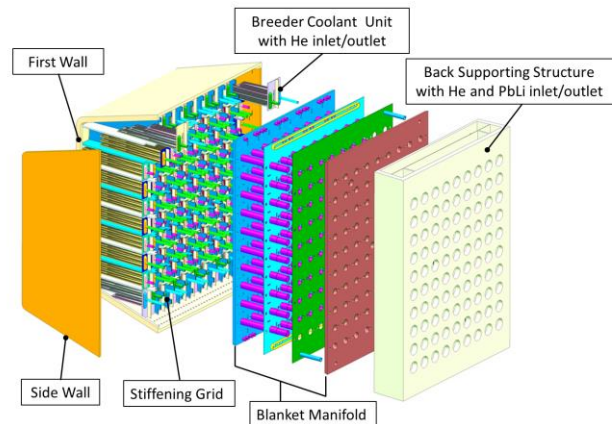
Exploded view of the HCLL breeder blanket module with PbLi/He manifolds and BSS.
